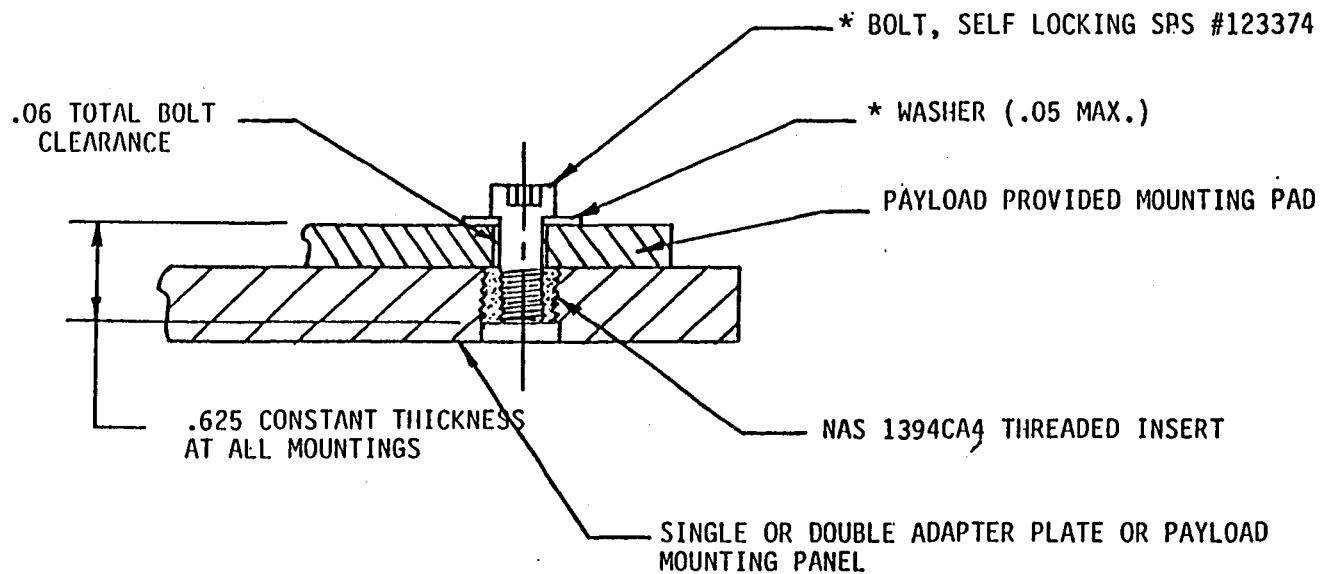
METHOD FOR MOUNTING PAYLOAD TO PAYLOAD MOUNTING PANEL
